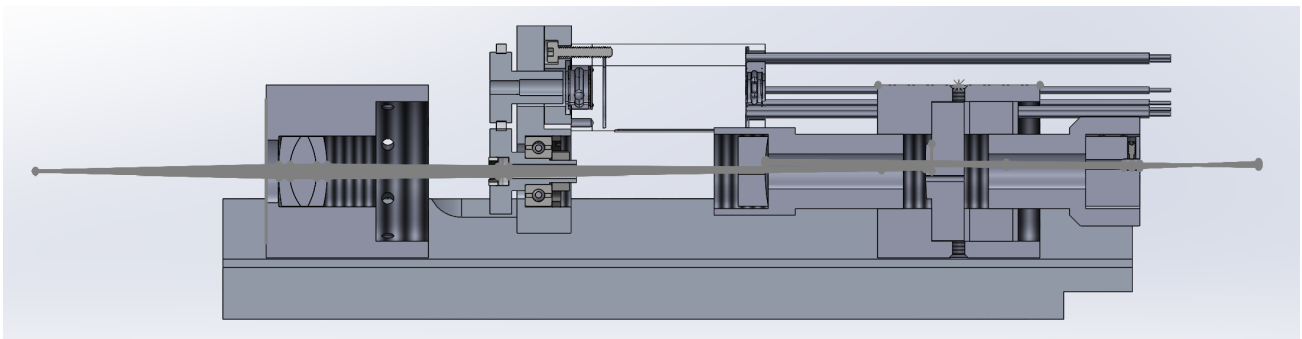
A cross-section view of the proposed 3-RPWFS opto-mechanical design for Shane AO testing.
